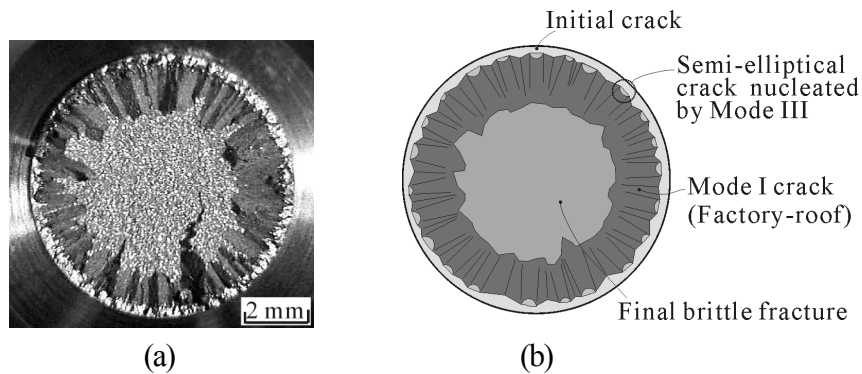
(a) Fracture surface of the circumferentially cracked specimen, $\tau_a = 132 \text{ MPa}$, $\Delta K_{III} = 11.5 \text{ MPa}\sqrt{\text{m}}$. (b) Formation mechanism of the factory roof.
